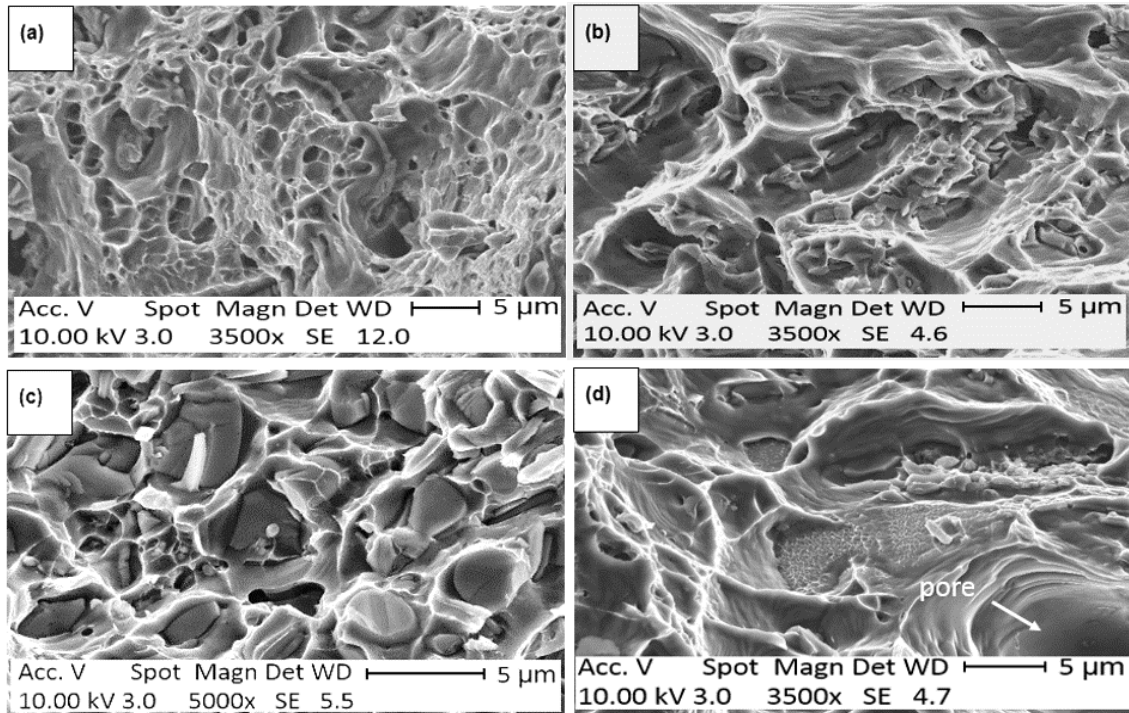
Fracture surface of WAAM 2319 tensile test specimens (a) oscillated as-deposited; (b) oscillated post-deposition T6 heat treated; (c) parallel as-deposited; (d) parallel post-deposition T6 heat treated
